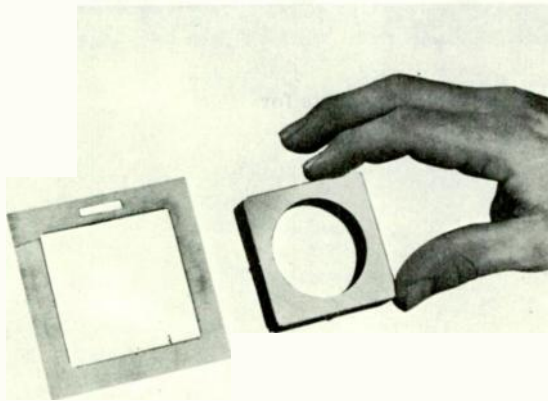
Camera aperture plate and tool. Hand held object is tool prior to mounting on ultrasonic toolholder.
